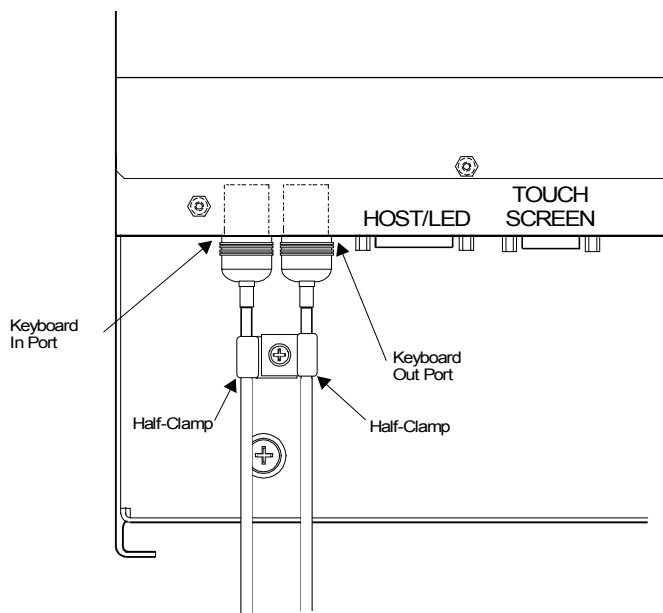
9. Installing the Keyboard Cable Half-Clamp(s)
